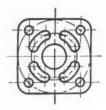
Sketch showing a perforated blank of the type which requires a fourstation die for producing one completed piece per press stroke.
